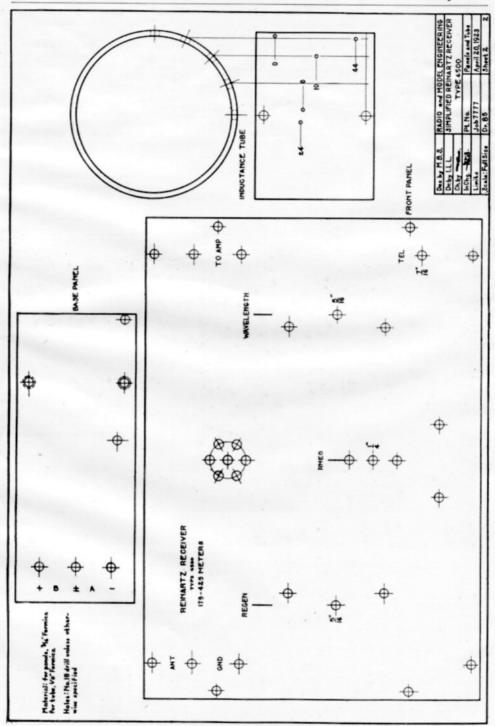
Drawings of the front and rear panels and coil tube are reduced to one-half scale, so that you can scale off the dimensions easily
